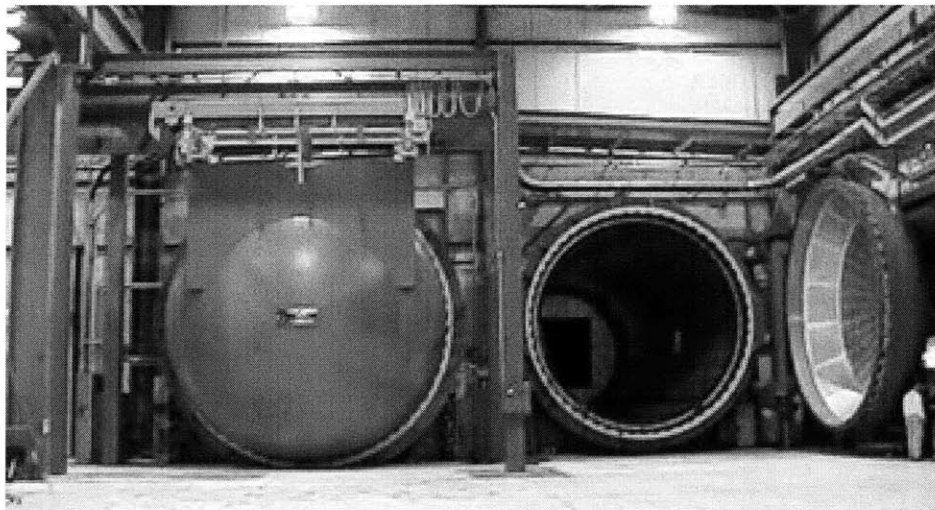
Custom-built Double Diaphragm Forming Machine [6]
